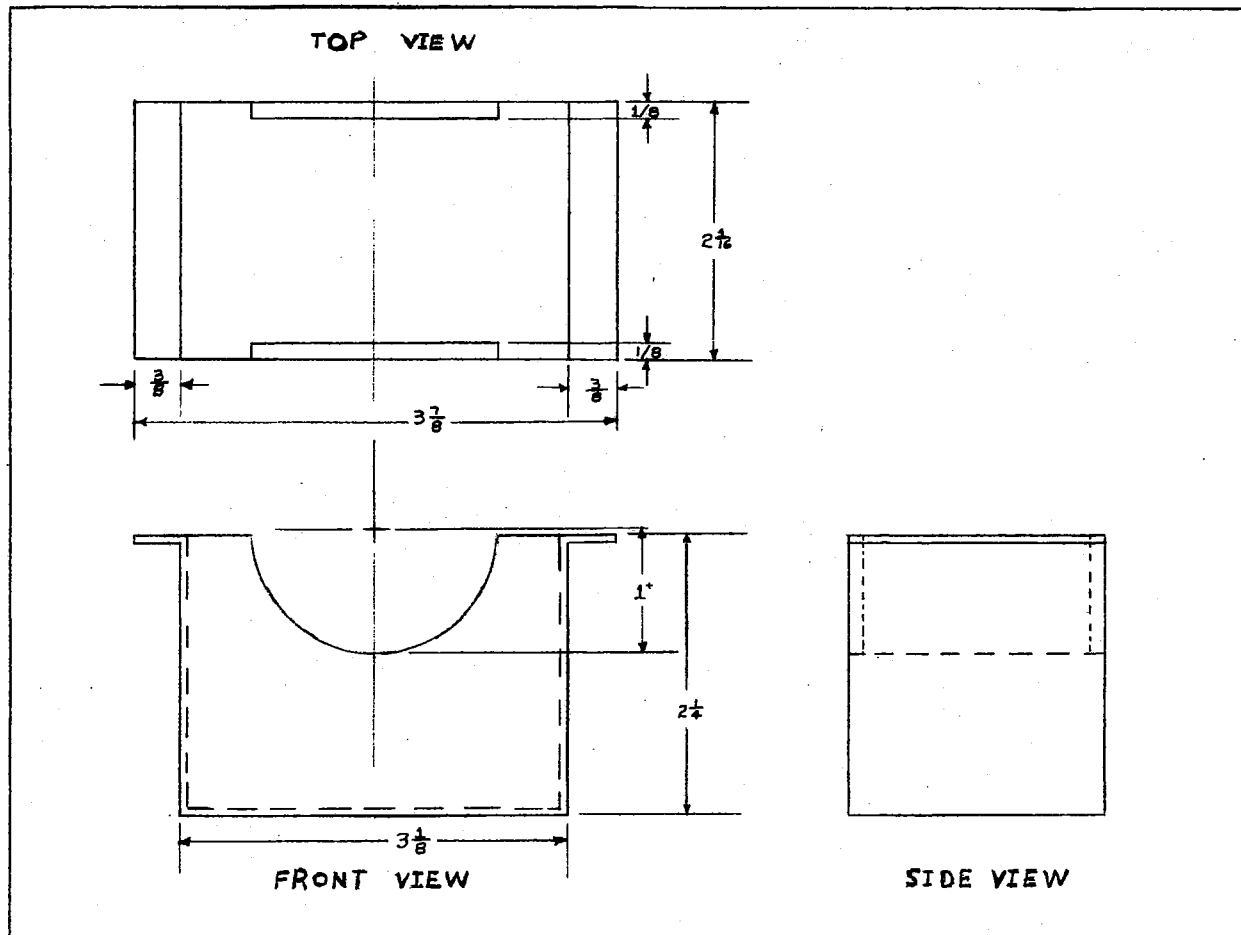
Detailed Dimensioned Drawing of the Outside Covering of the Material Catch Tank
